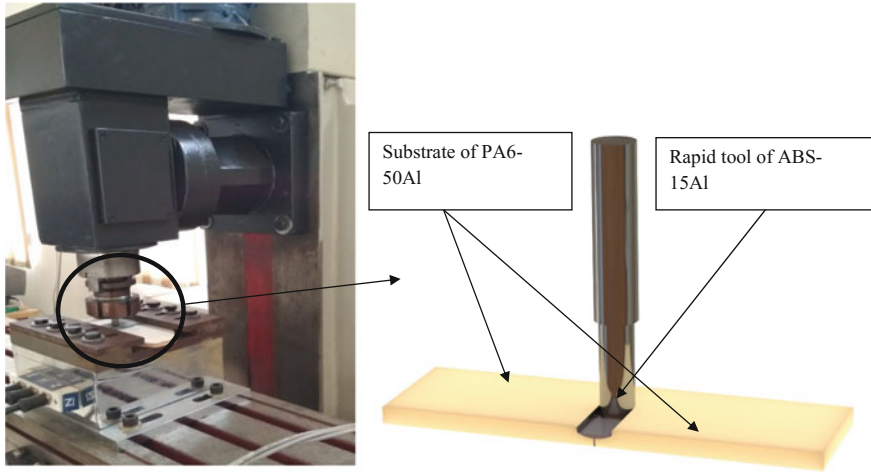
Actual experimental view of the welding process with rapid tool
